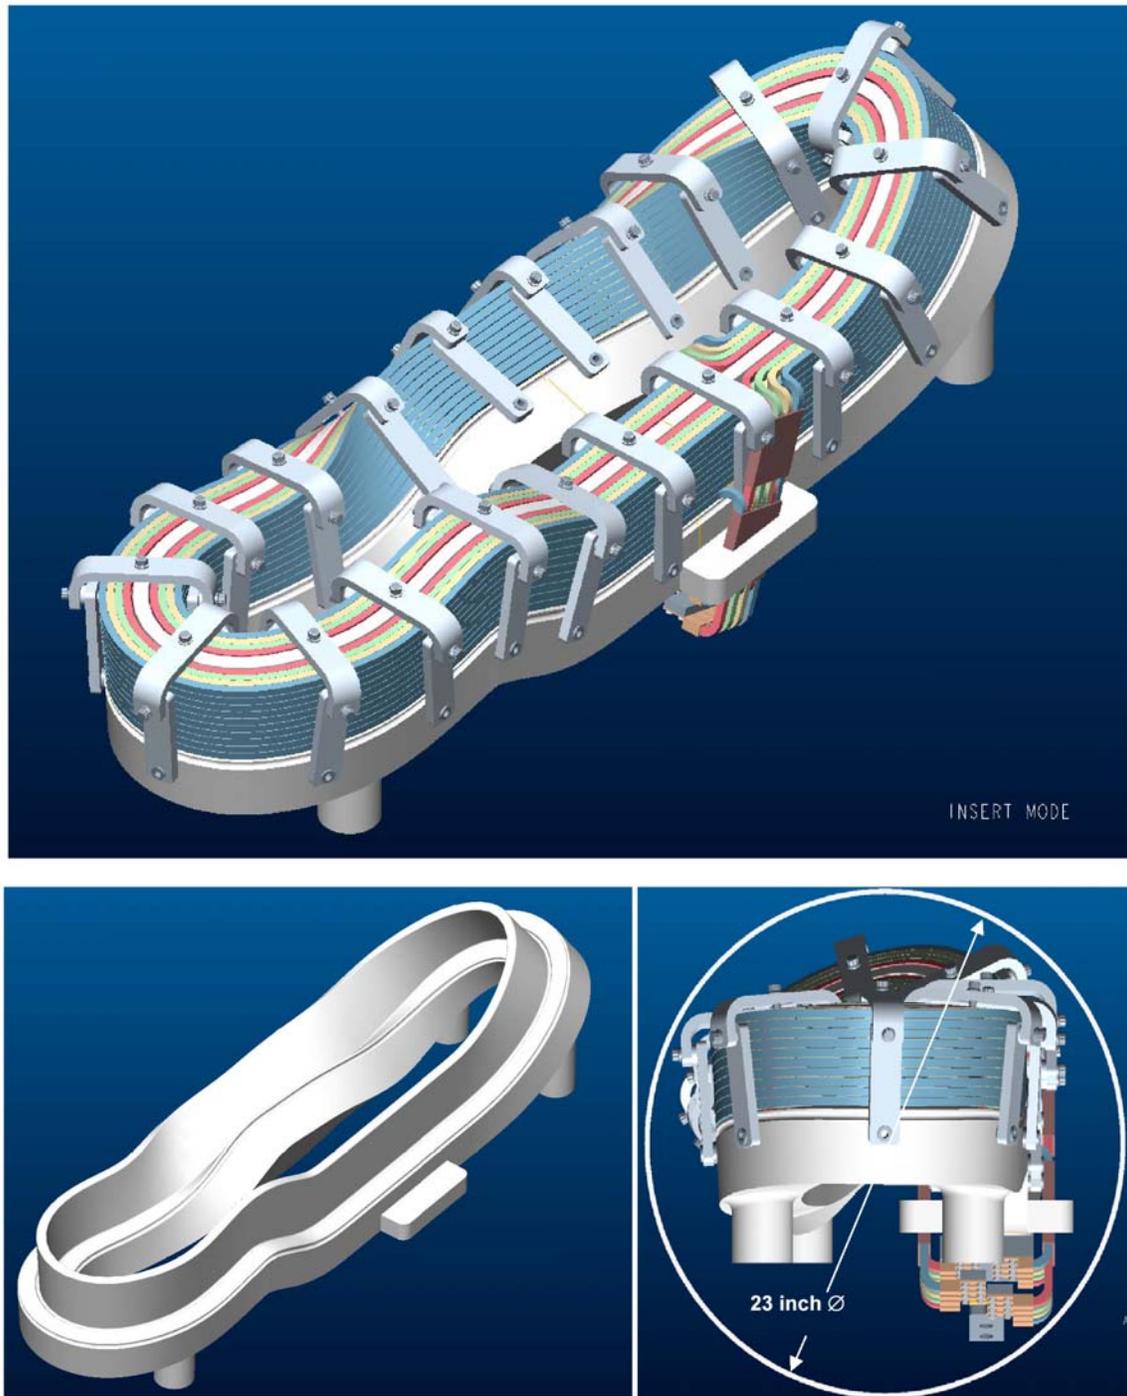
"Twisted Tee" demonstration coil showing coil assembly, cast winding form, and end view of assembly in vacuum oven
